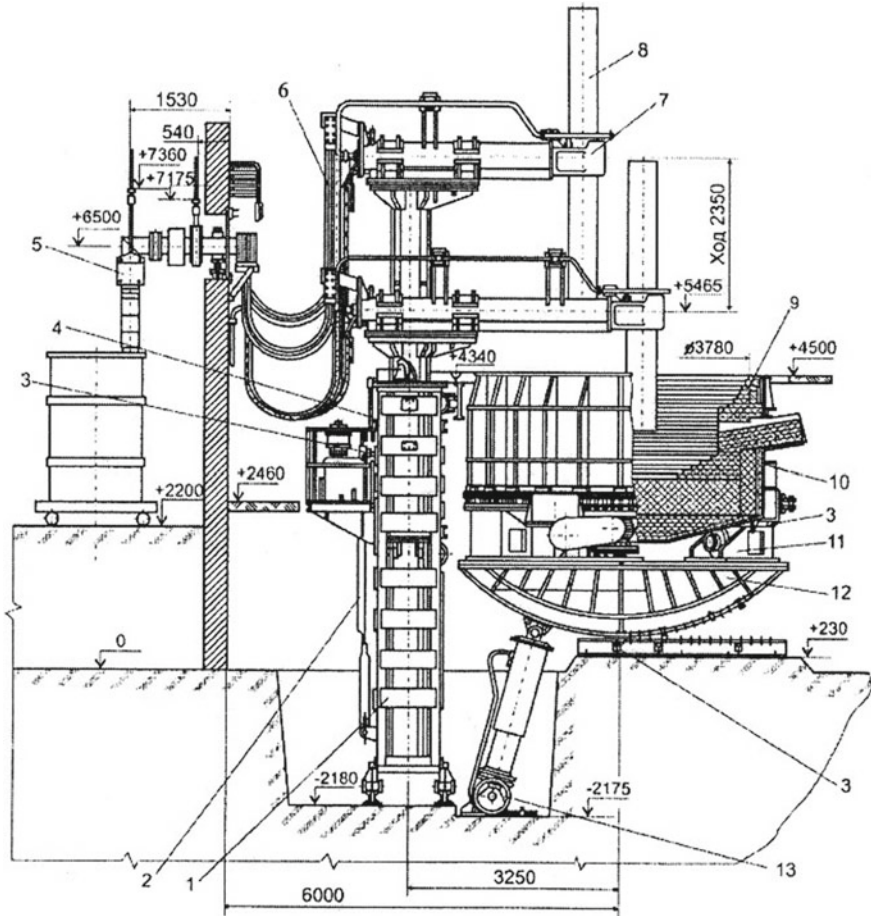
Refining electric furnace RKO-2.5N2, 1—shaft of the mechanism for moving the electrode; 2—mechanism for moving the electrode; 3—final switch; 4—centralized lubrication; 5—short network; 6—current lead; 7—electrode holder; 8—electrode; 9—lining; 10—a casing; 11—the mechanism of rotation of the bath; 12—tilt mechanism; 13—hydraulic drive system; 14—air supply; 15—water cooling system
